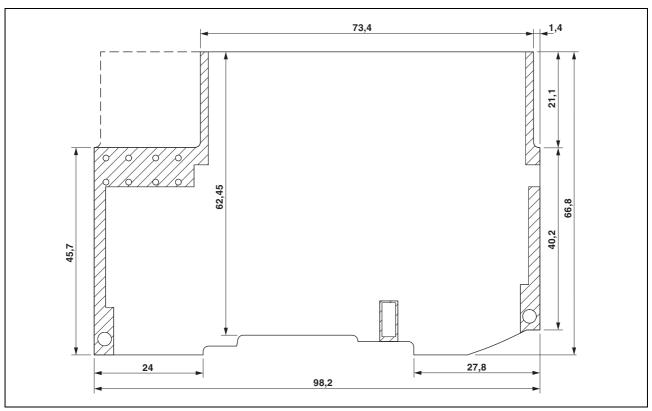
Maximum dimensions of the PCB of the 9U lower housing part without the use of the DIN rail connector, with 7U and 9U housing cover
